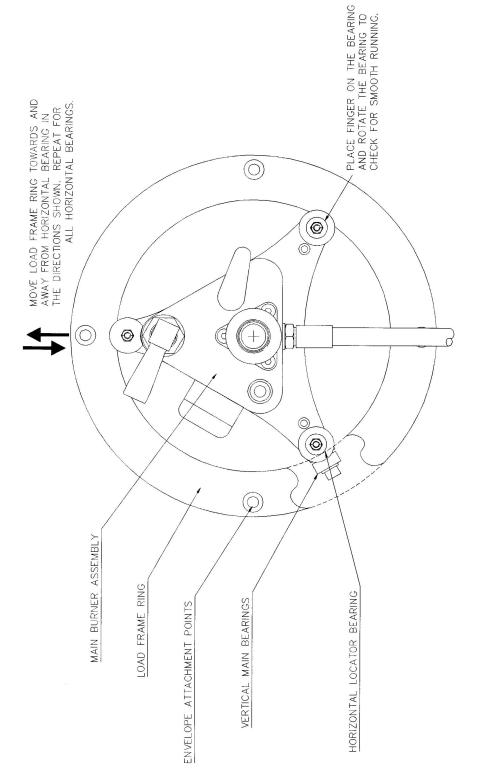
CLOUDHOPPER BEARING INSPECTION.
